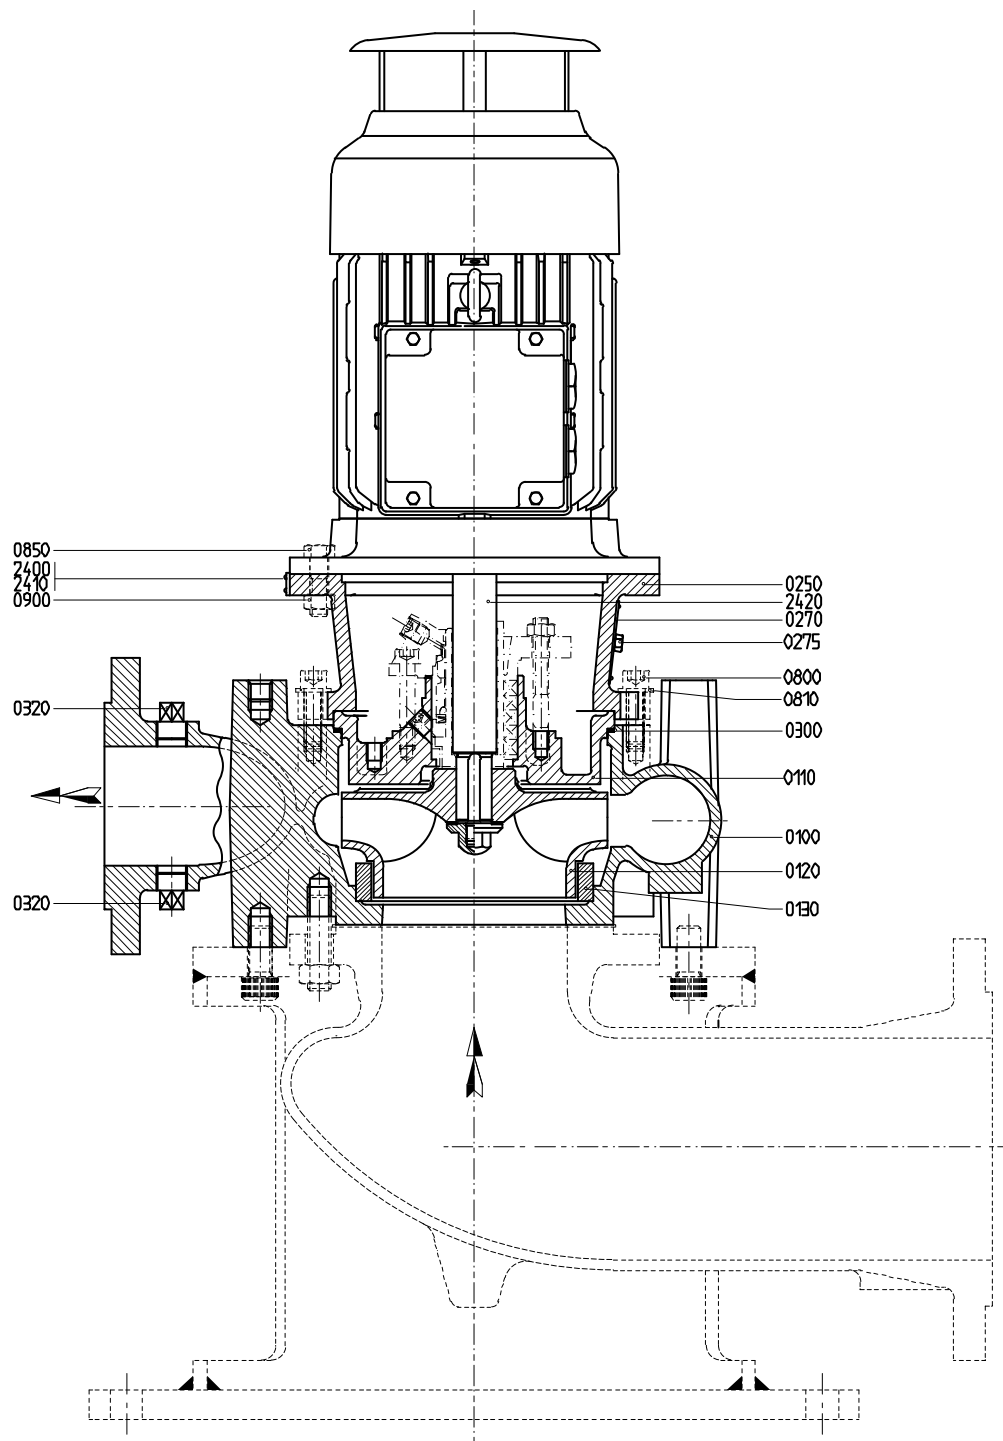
Sectional drawing M1/M2/M3/S2/S3/S4.
